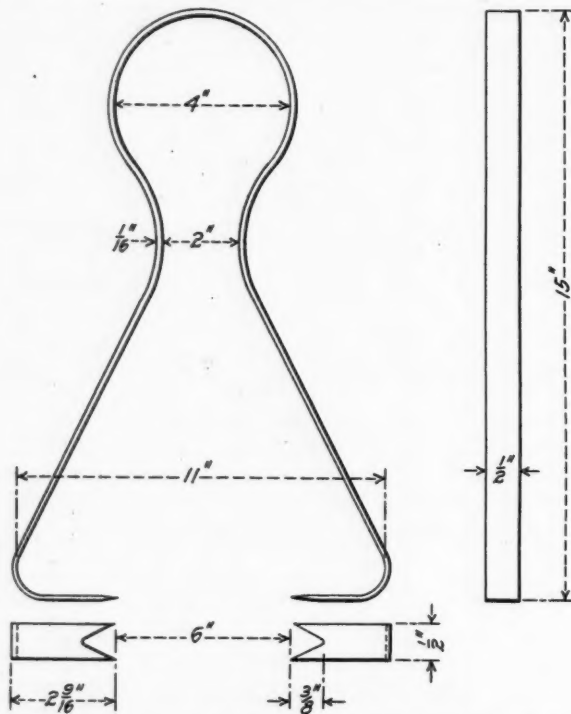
Ice Tongs for Passenger Car Water Coolers.
